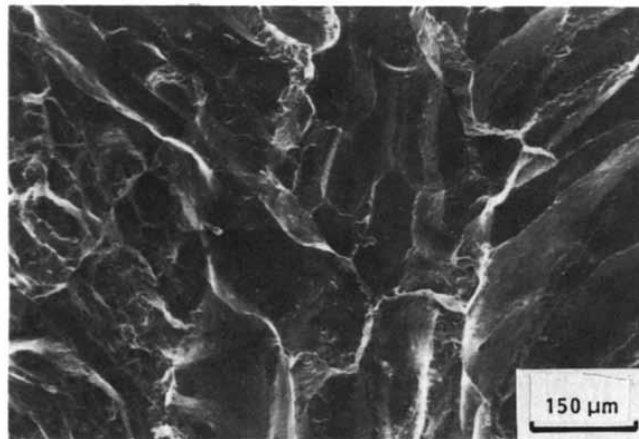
Intergranular fracture of laser-welded 4130 steel tempered at 300°C for 1 hour^[16].
